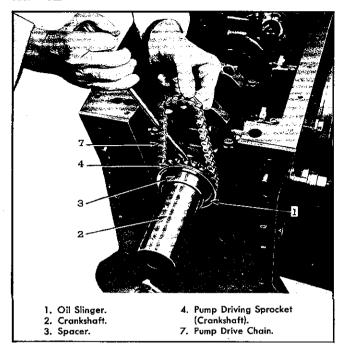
Removing Lubricating Oil Pump Driving Sprocket from Crankshaft.
